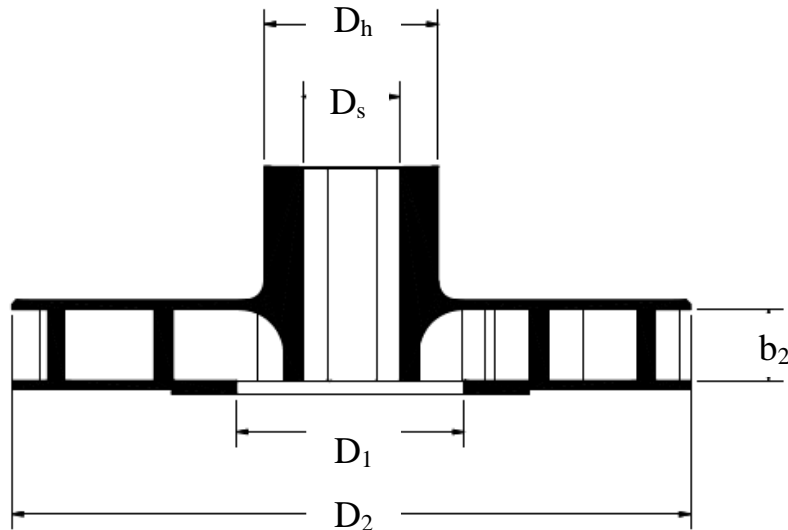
Sectional view of a closed radial impeller with geometric parameters
